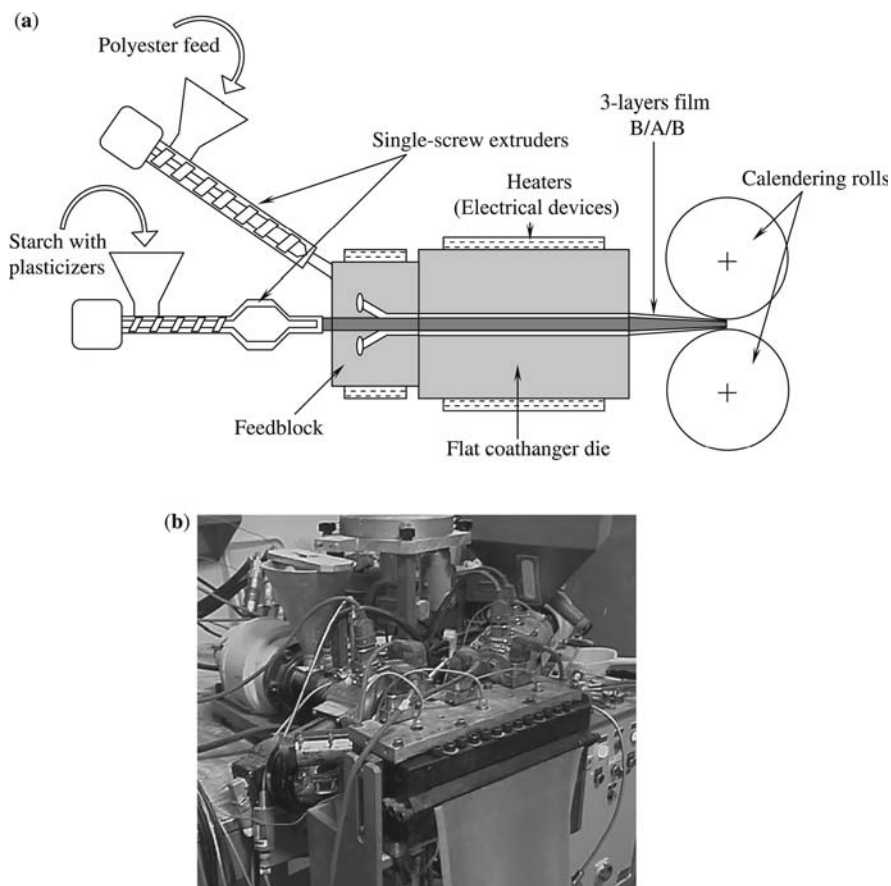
(a) Schematic illustration of the coextrusion system; (b) photograph of the experimental set-up without the three-roll calendaring system on the right side; the mono-extruder is for biopolyester feed.
